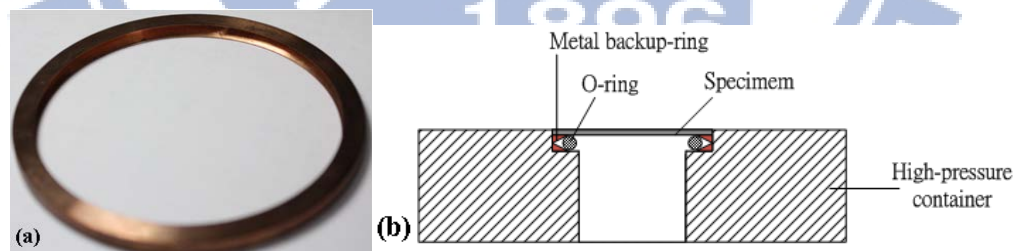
(a) The metal backup-ring and (b) schematic representation for the assembly of the high-pressure seal and the high-pressure container.
